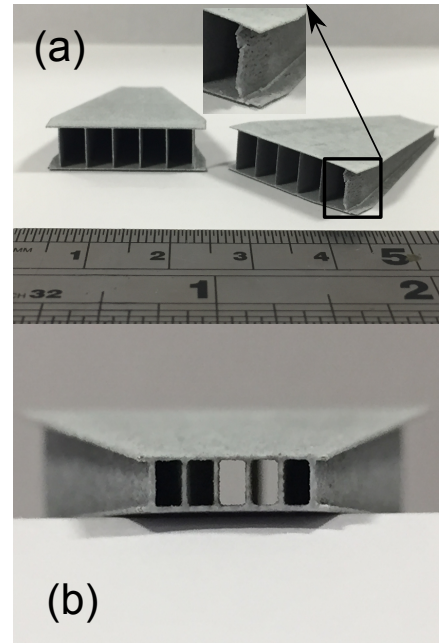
Two of the stainless steel 316L printed test pieces painted with Gd-paint post thermal cycling (a) left, 0.2 mm wall thickness, right, 0.1 mm showing wall damage. (b) close view of sample side of 0.2 mm collimator.
